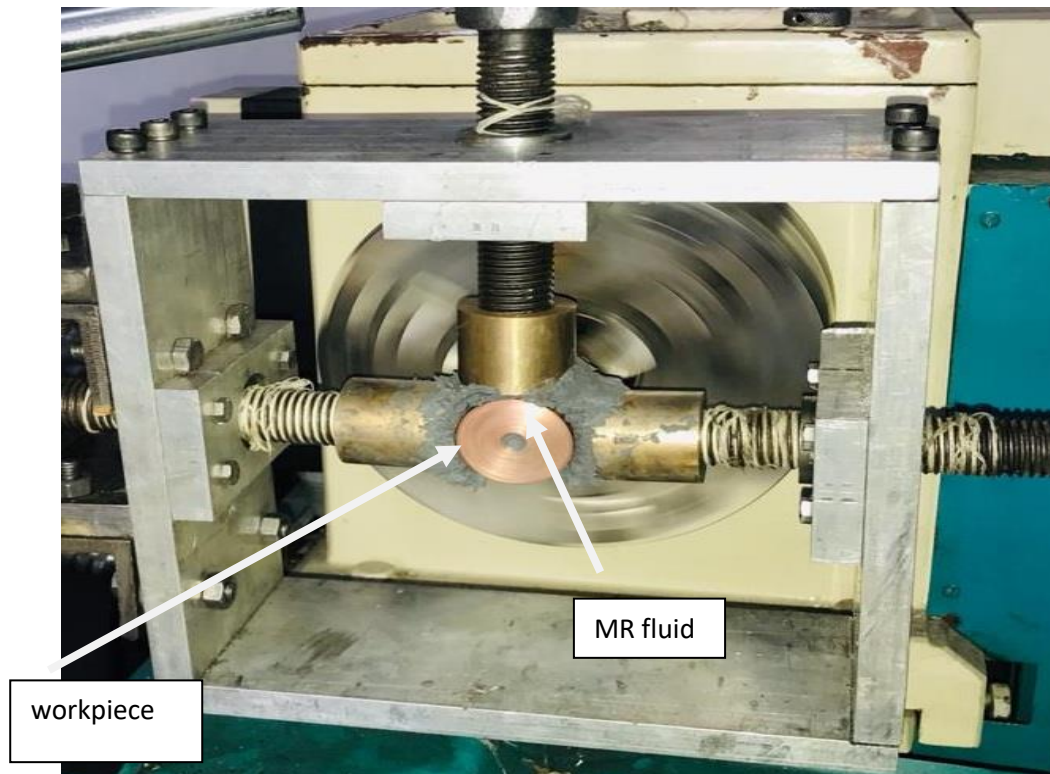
Actual photograph of an experimental setup during finishing of copper cylindrical workpiece.
